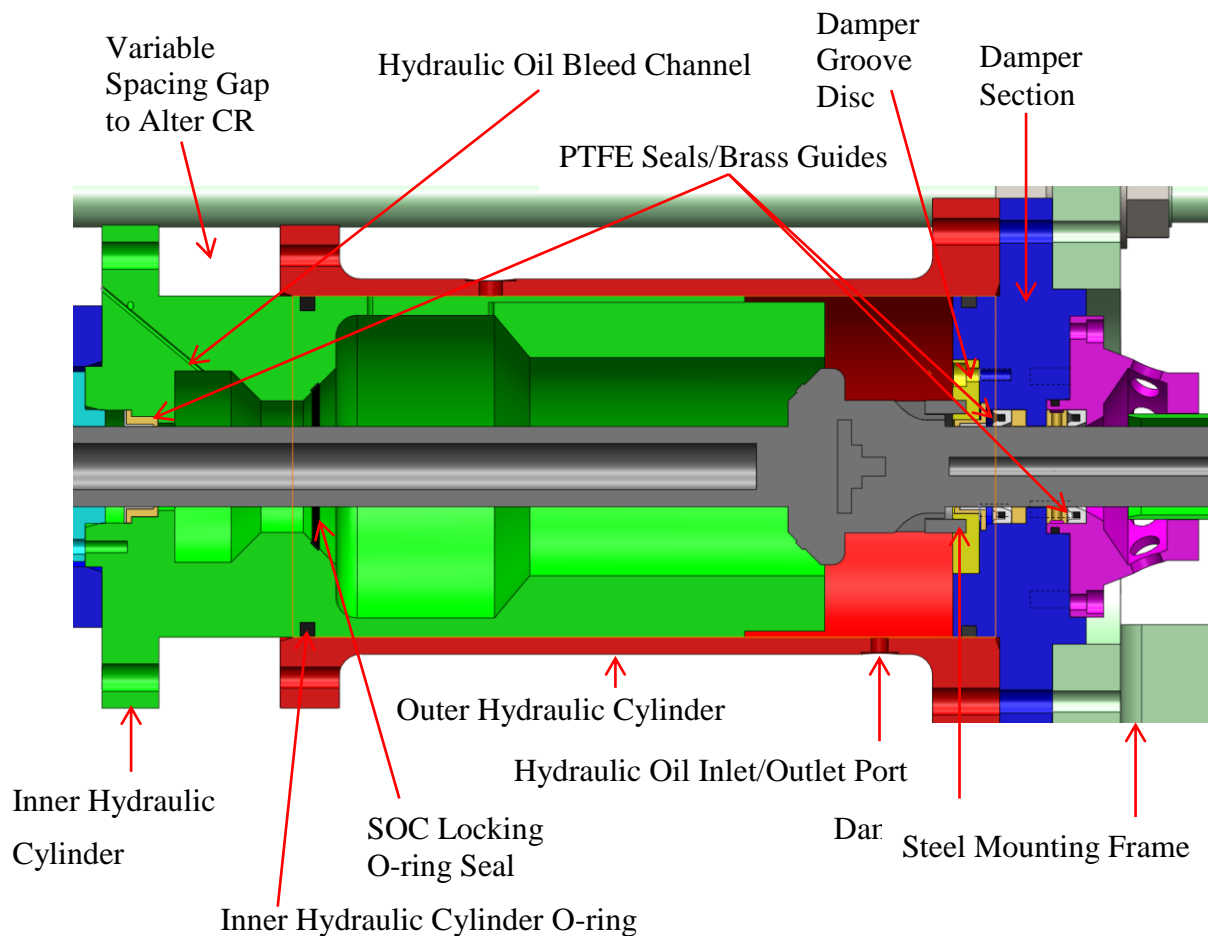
SolidWorks model cross section of section B: Hydraulic locking/dampening chamber (Piston assembly at EOC).
